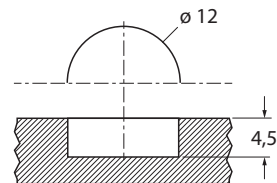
Hole dimensions for inserting the tag in metal (TW-R12...)
